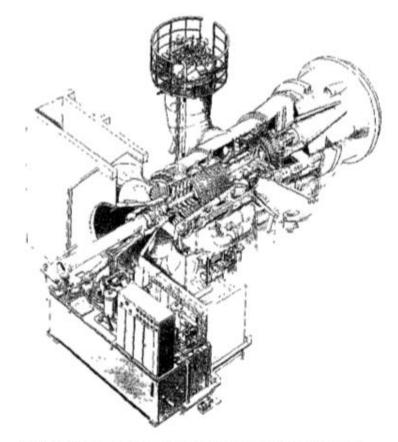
Large single-shaft gas turbine [courtesy Siemens]
